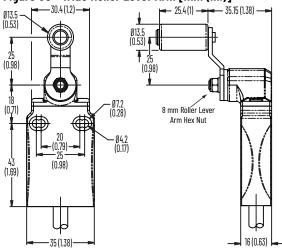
Adjustable Roller Lever Arm [mm (in.)]
